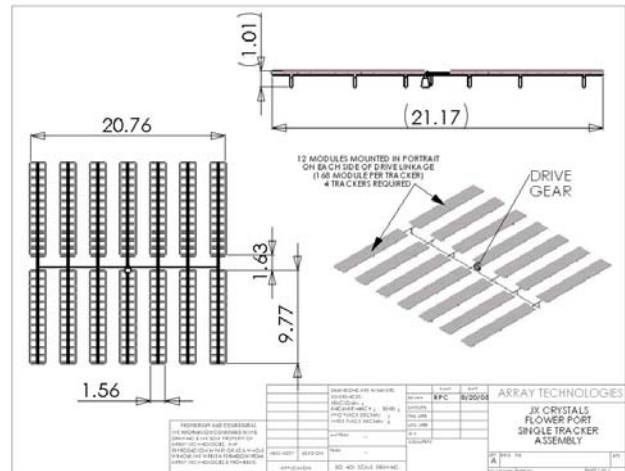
Design drawing for 25 kW horizontal beam tracked array consisting of 7 beams, each with 24 3-sun panels, and one drive motor and drive beam.
